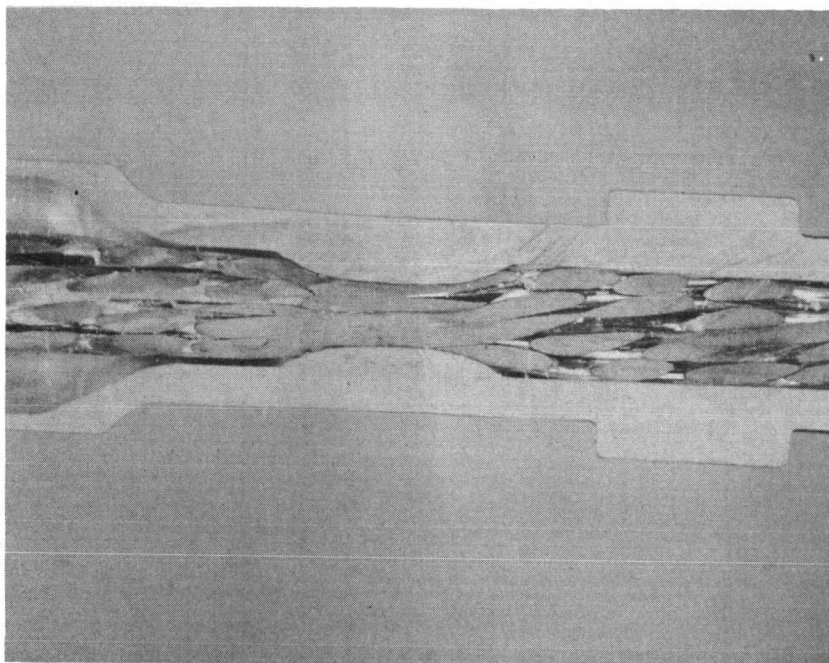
CESO-20-SO46-20 Section View of Crimped Contact
